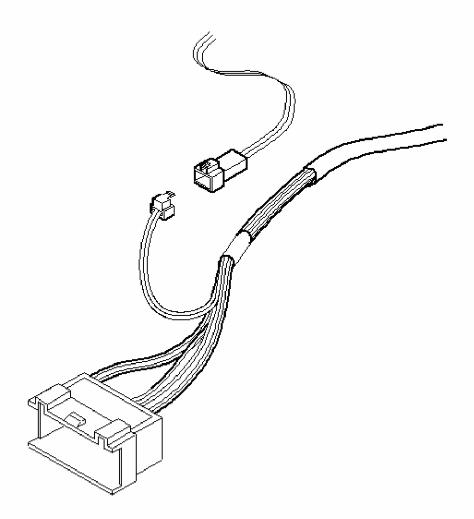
Disconnecting/Reconnecting Theft Deterrent Control Module Connector Courtesy of GENERAL MOTORS CORP.
